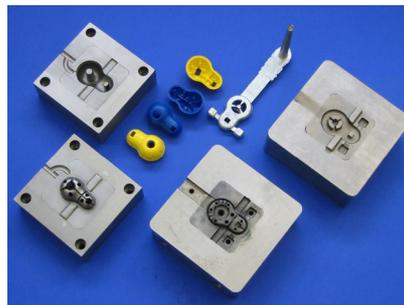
CMB-made injection molding (left) and die casting (right) inserts together with molded parts
